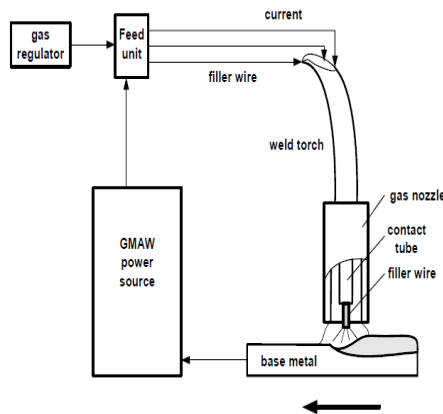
Schematic Representation of Gas Metal Arc Welding Process (GMAW)
